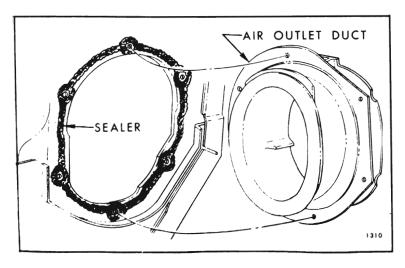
Shroud Side Air Outlet Duct Sealing
